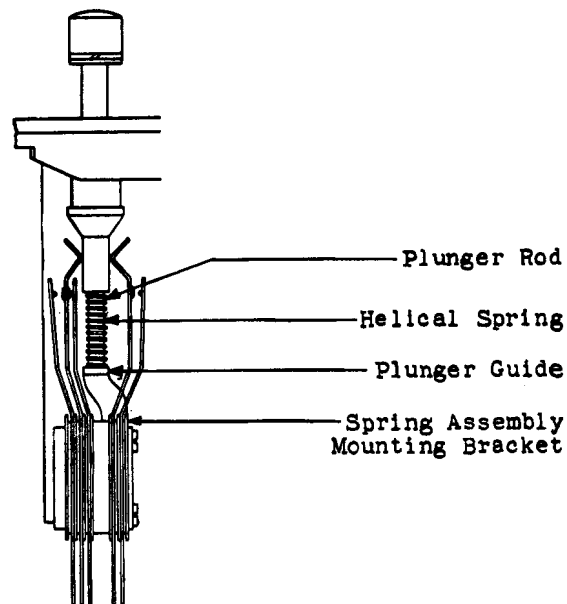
Key Equipped With Spring Assembly Mounting Bracket Having Plunger Guide
